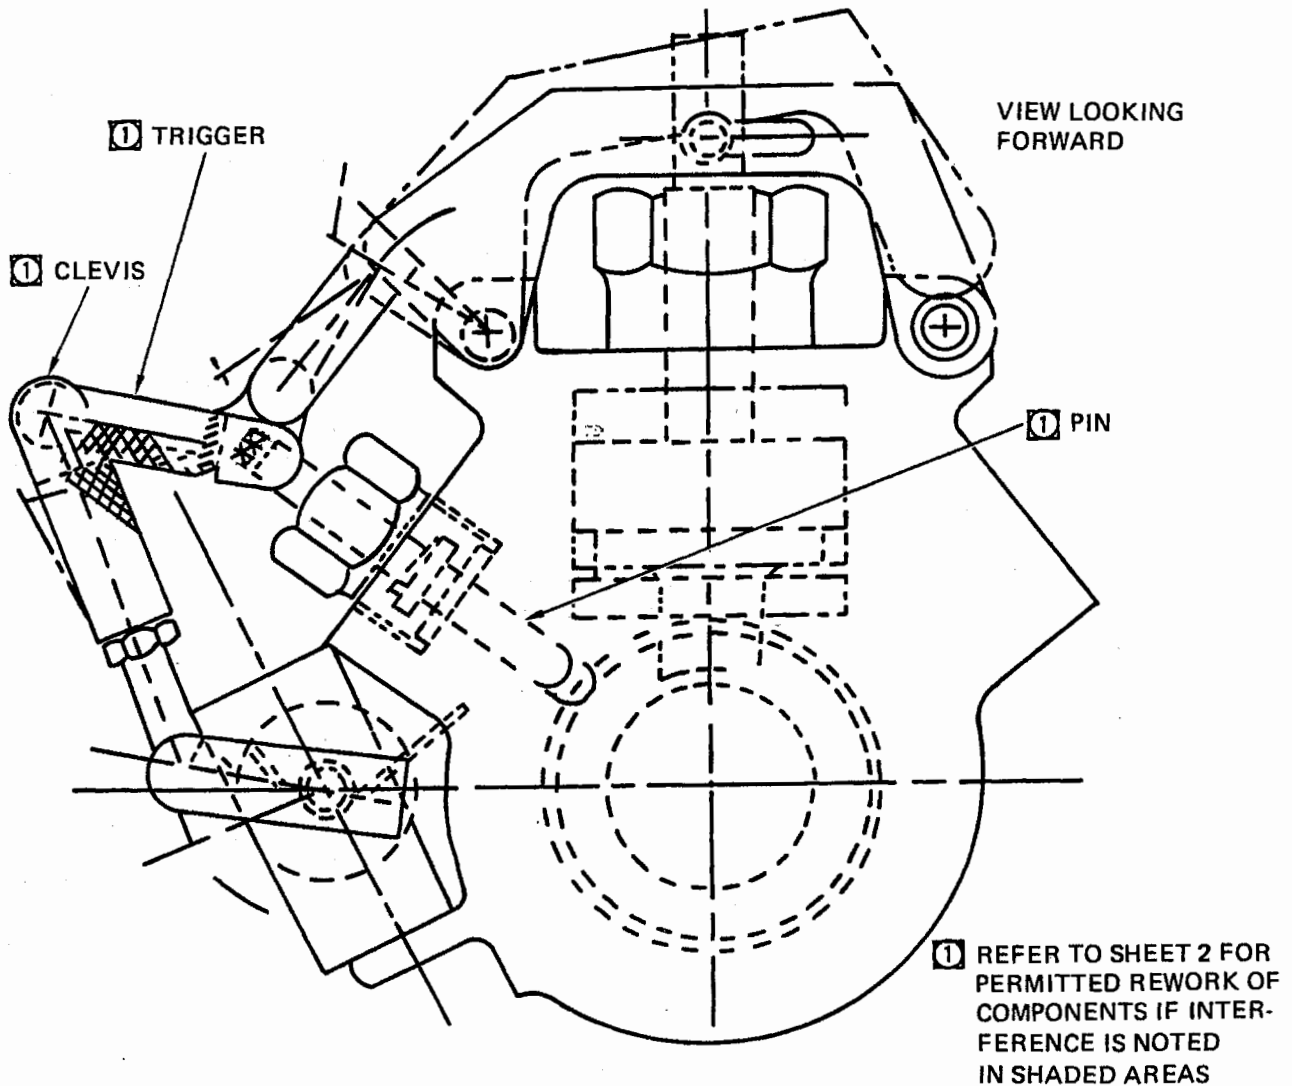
Nose Gear Downlock Switch Components - Permissible Rework (Sheet 1 of 2)
